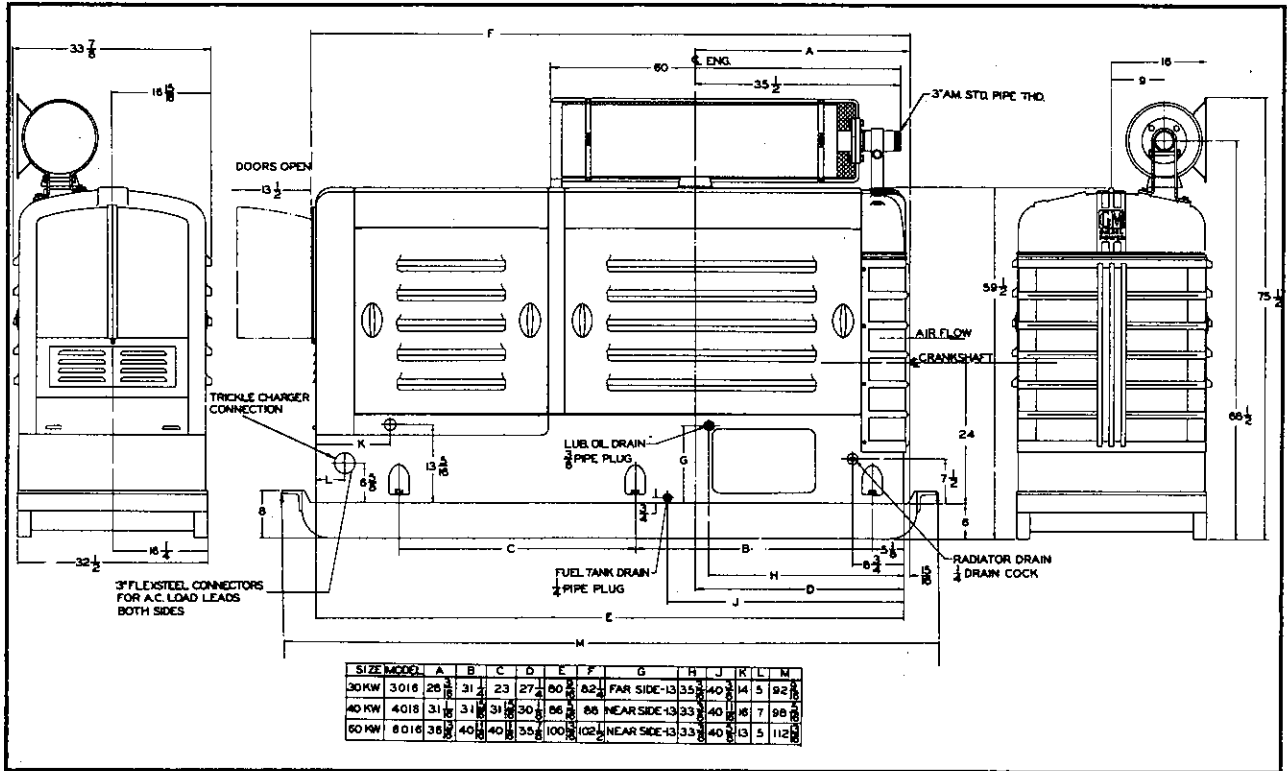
Outline Dimensions—Models 3-71, 4-71, and 6-71 Engines.
